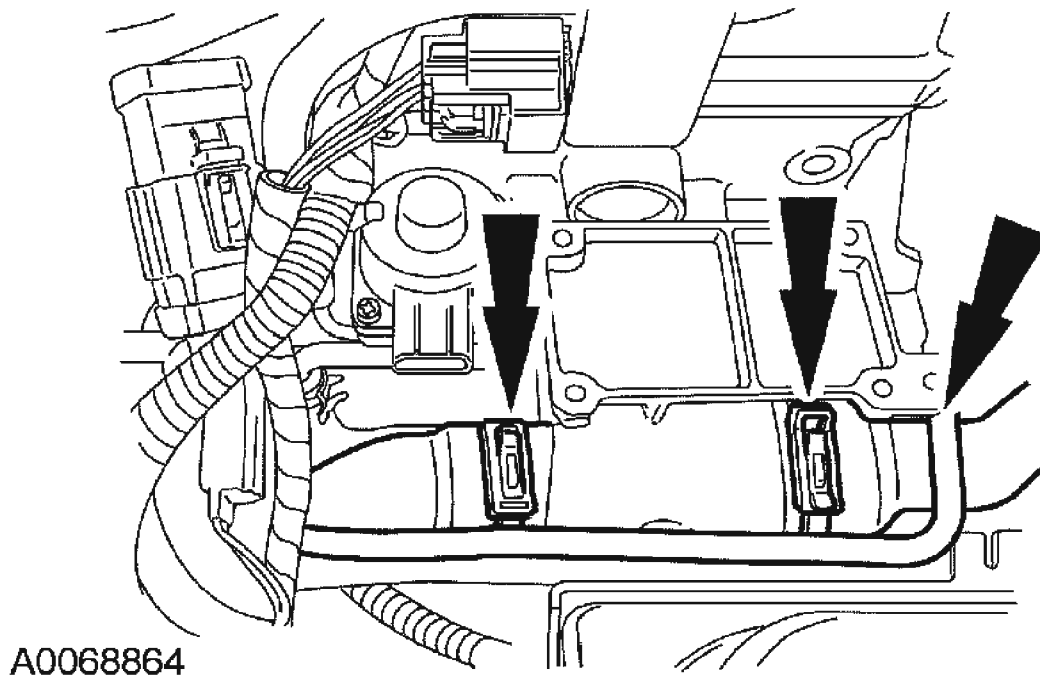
Connecting Upper Radiator Hose, Heater Hose And Coolant Vent Hose To Coolant Bypass
